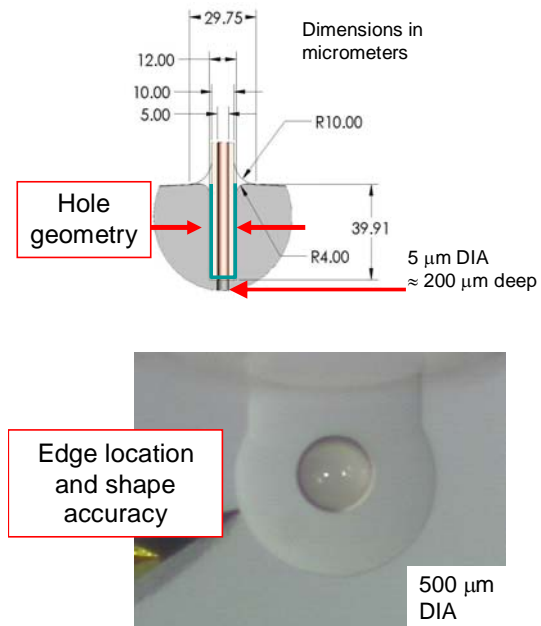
a) Fill tube assembly for NIC target designs. High aspect ratio, micrometer sized holes required for assembly. b) HEDS capsule assembly of silica bead molded in aerogel (50 mg/cc SiO₂). Target geometry requires micrometer concentricity and low density materials are difficult to profile without fracture.
